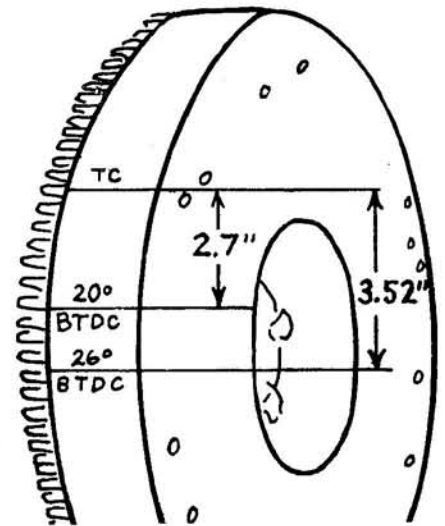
A—If installing a flywheel having only the 26° BTDC timing mark in engine equipped with mechanical governor type fuel injection pump, locate and stamp the 20° BTDC timing mark on flywheel according to dimensions shown above. Measurements are made around circumference of flywheel.
